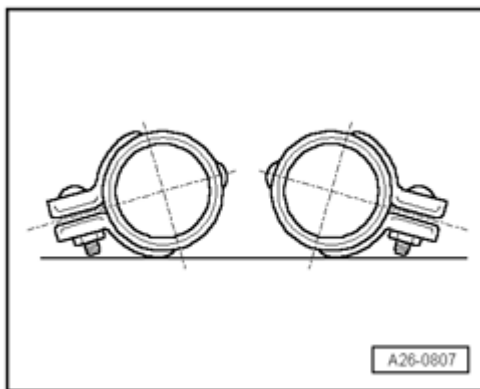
Installing Double Clamps So That Bolt Ends Do Not Project Over Lower Edge Of Double Clamp
